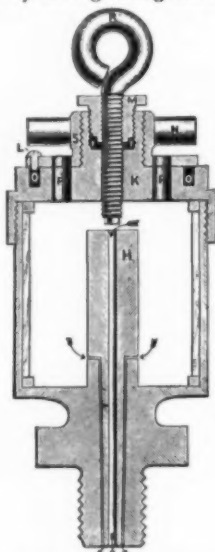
IMPROVED DOUBLE-FEED OILER.
